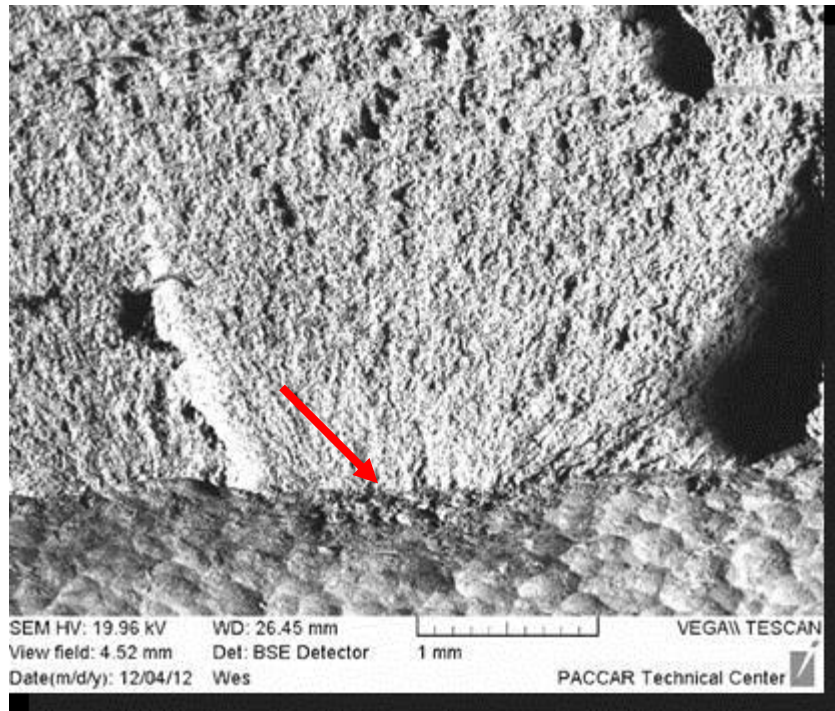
Location of Fracture Surface Inspection
